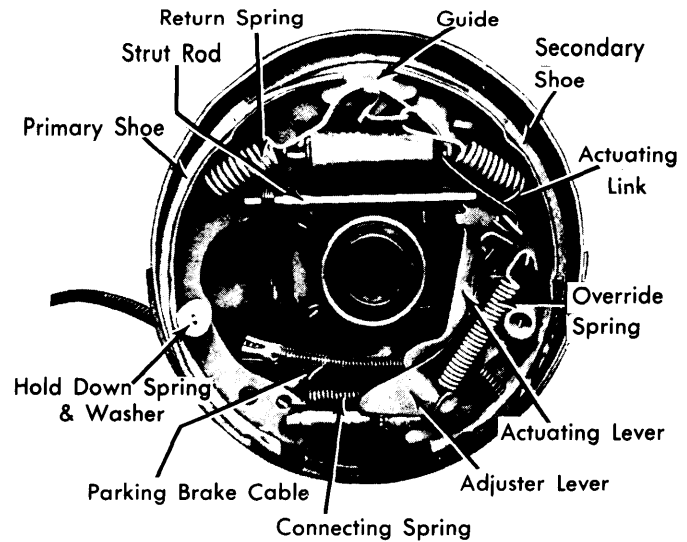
Brake Assembly (Typical, Exc. Cadillac)
